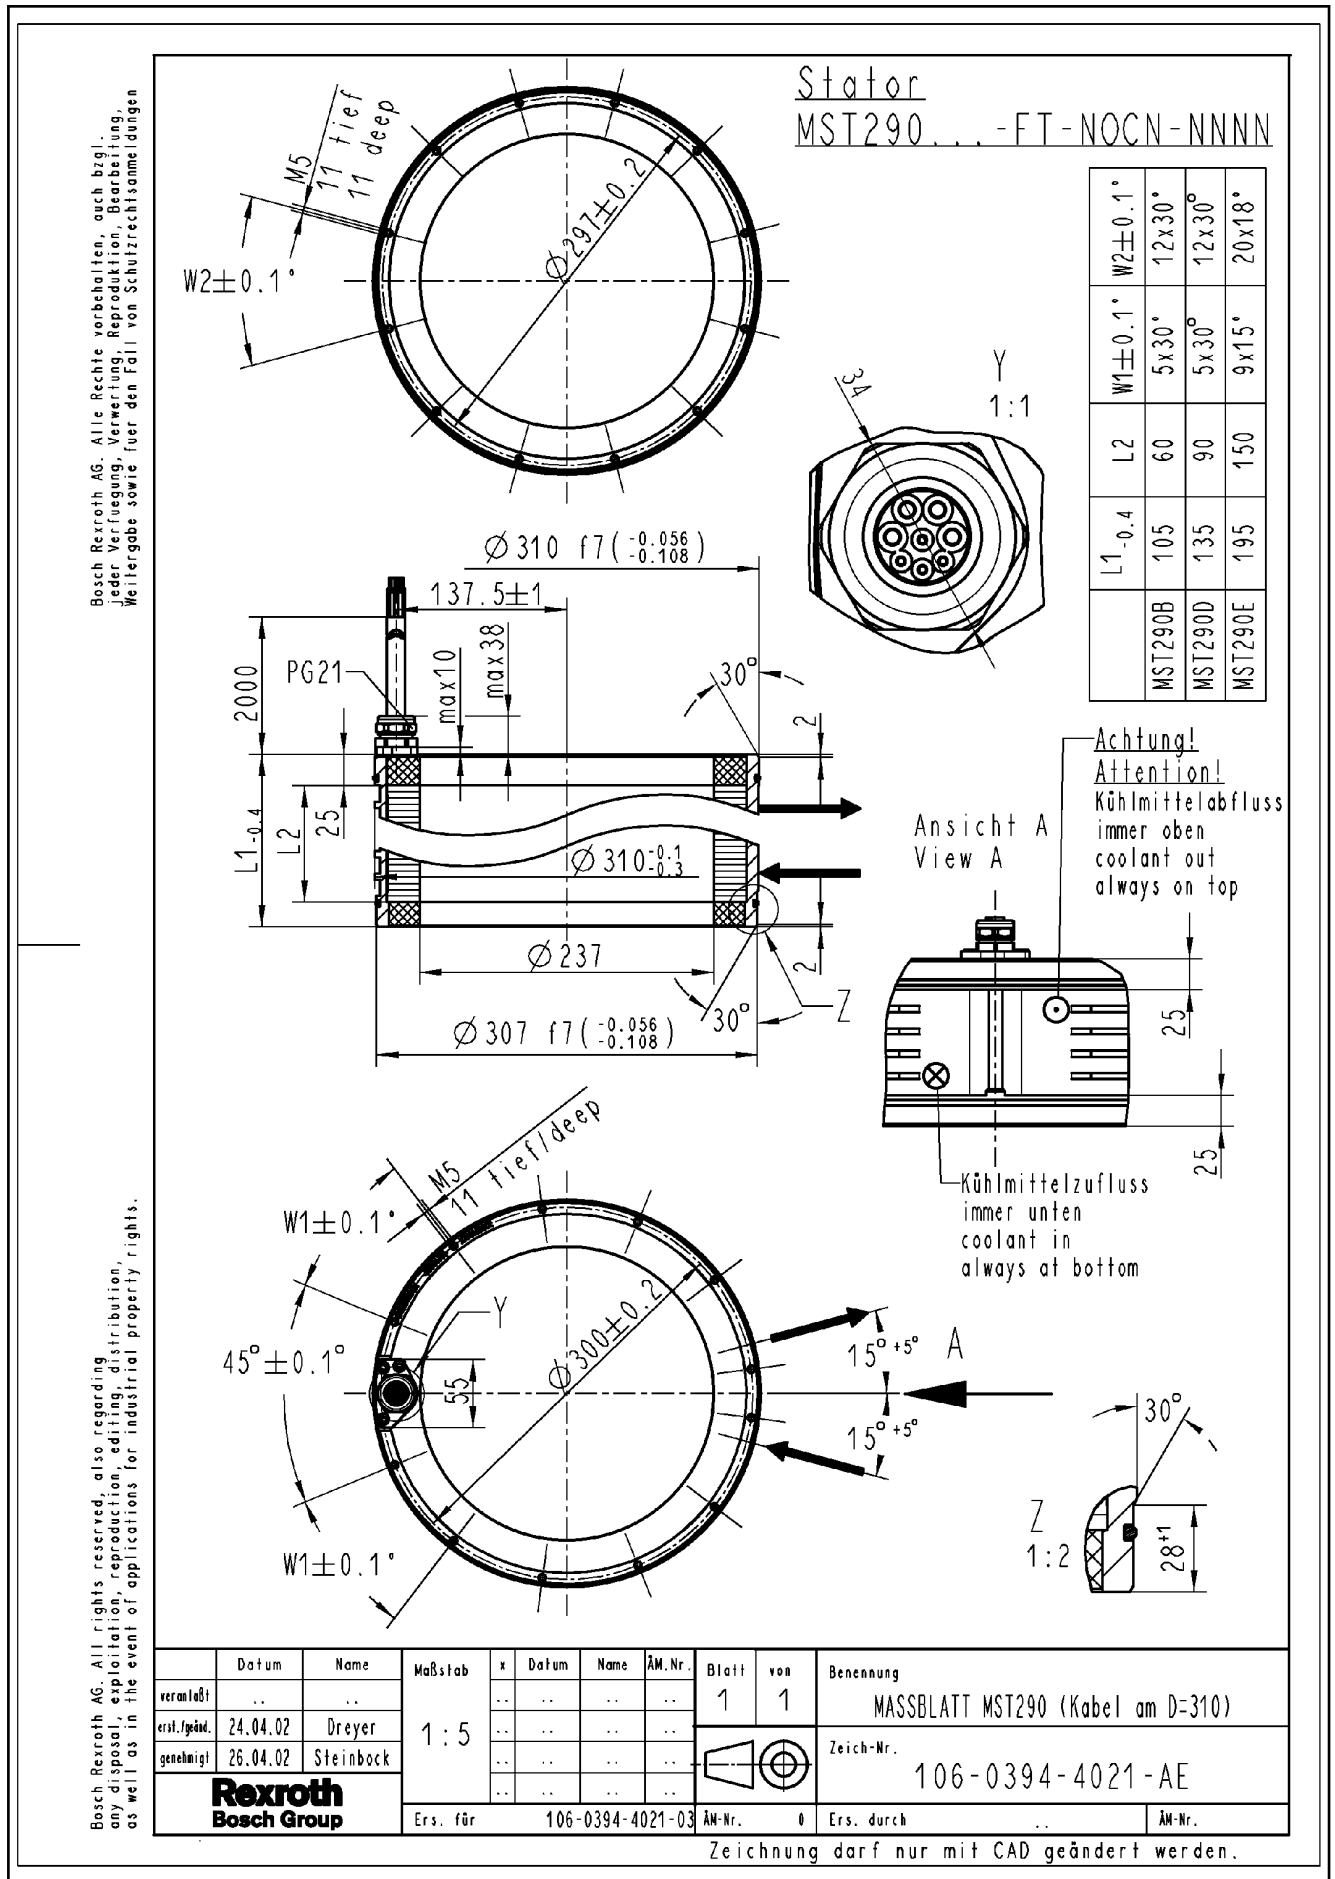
Dimension sheet MST290, electrical connection "CN"
